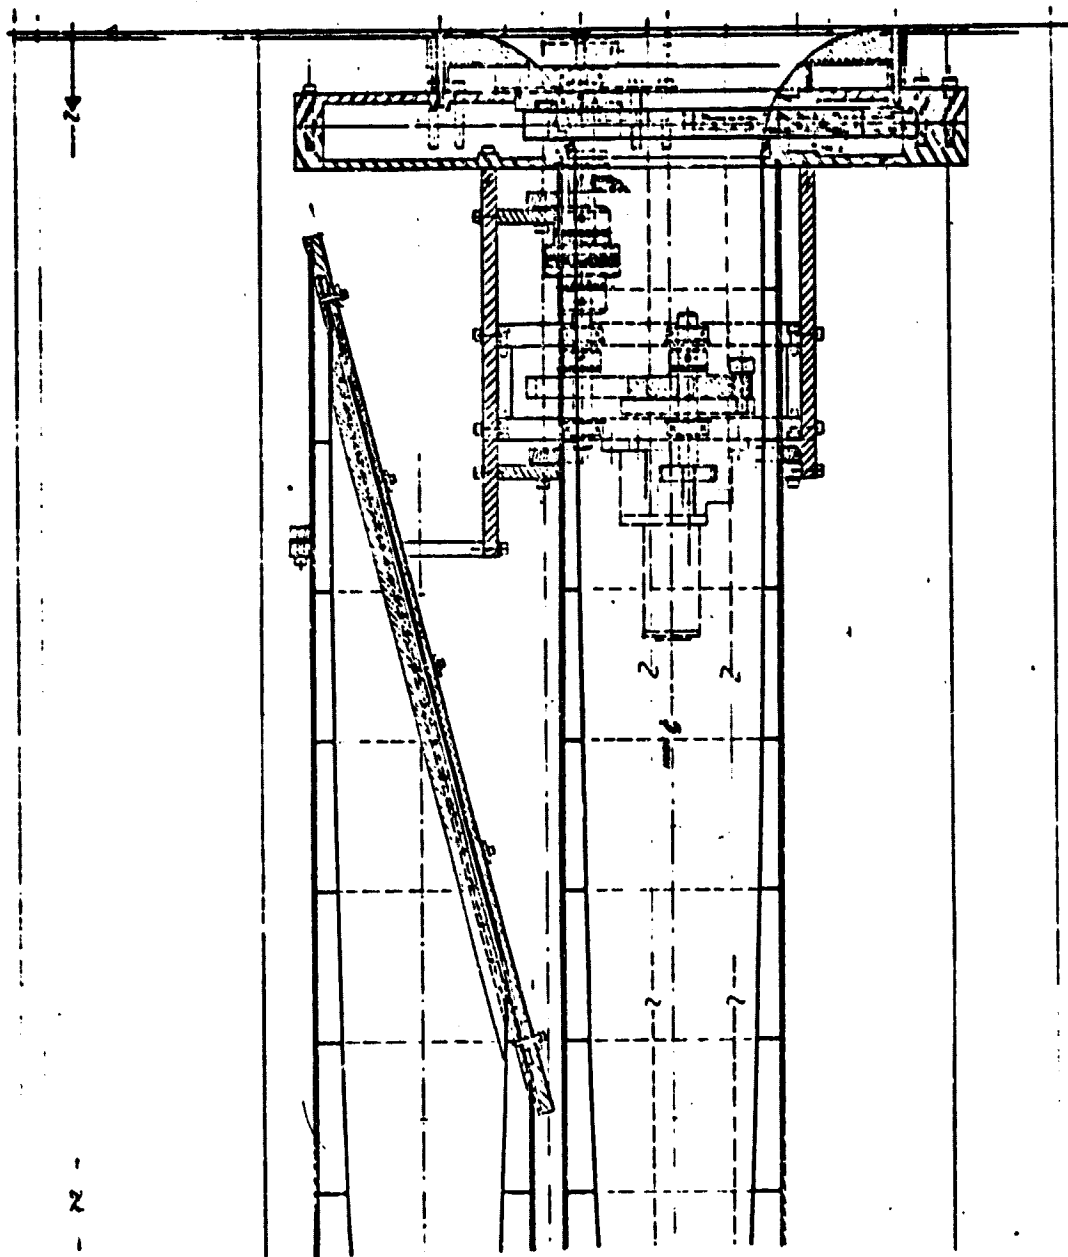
Input Optics Mechanical Configuration, Side View
